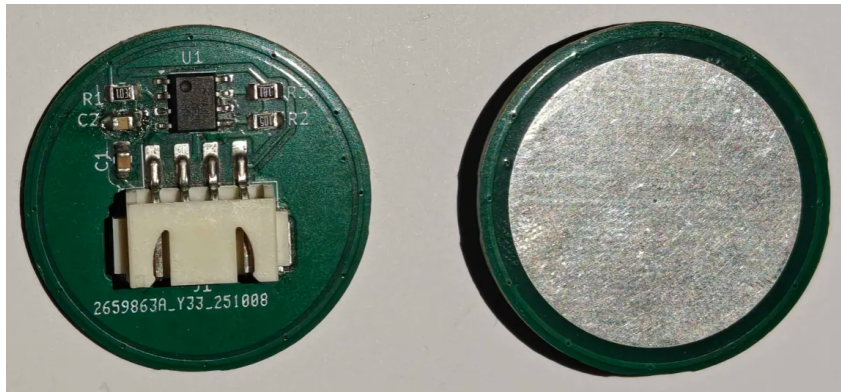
Top and bottom view of the non-contact electrode PCB
